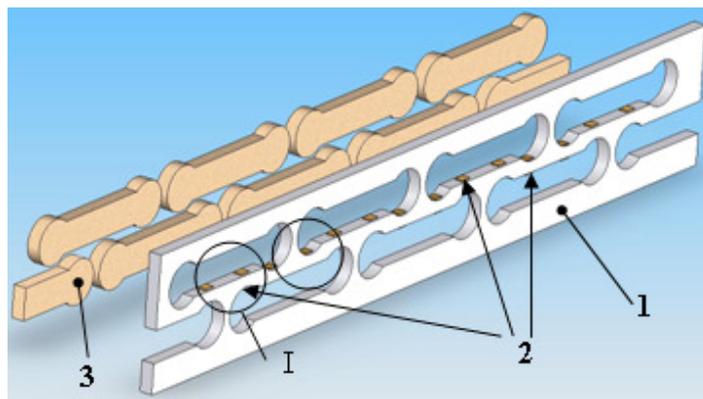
WIM principle: 1 - spring element; 2 - strain gauges; 3 - soft foam.
